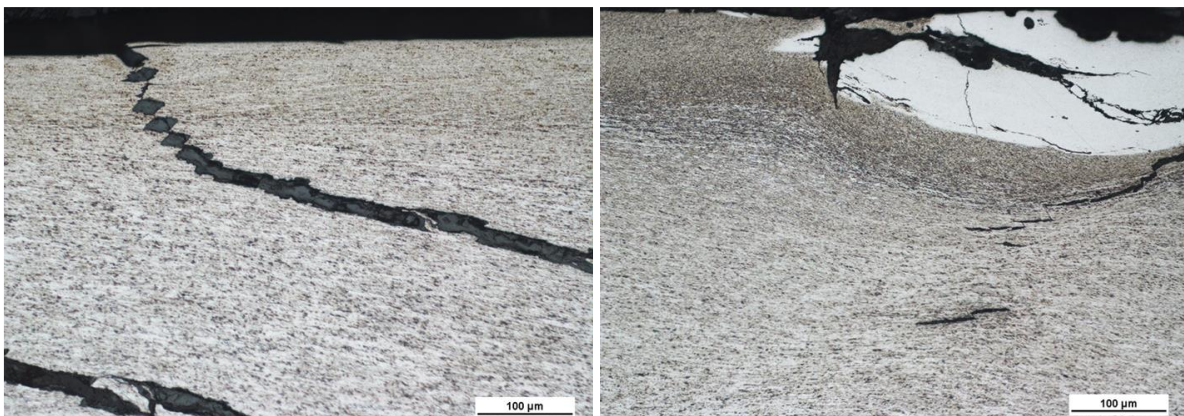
Cracks, pipe altered material and tooth material in the gouge of damage BG4 from Pipe 5.
